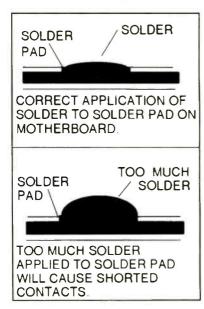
It does not require much solder on the pad to hold the SMD properly.
